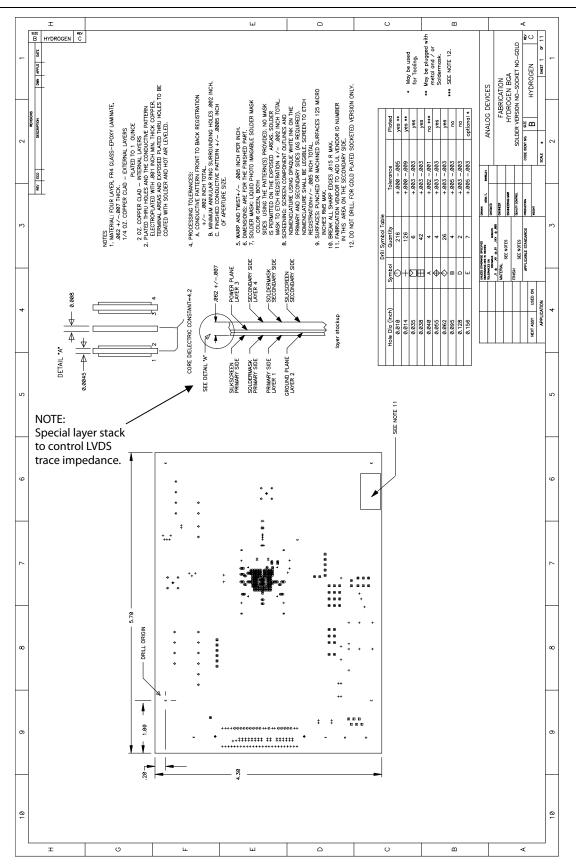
PCB Fabrication Detail, AD9736 Evaluation Board, Rev C
